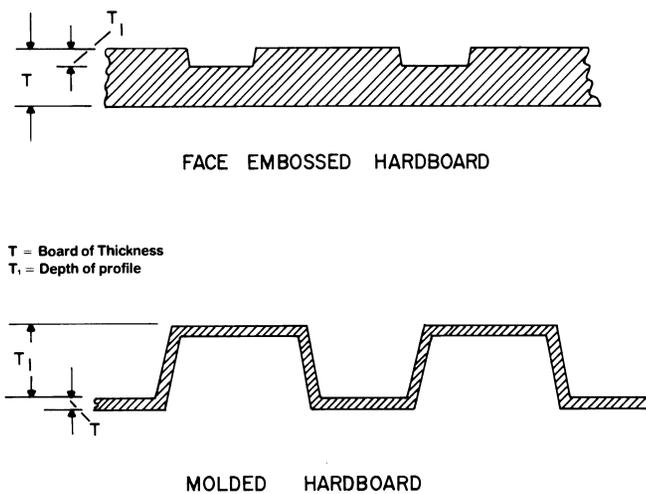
Illustration of basic difference between face-embossed and molded hardboard. In face-embossed boards, T_1 is always smaller than T .
